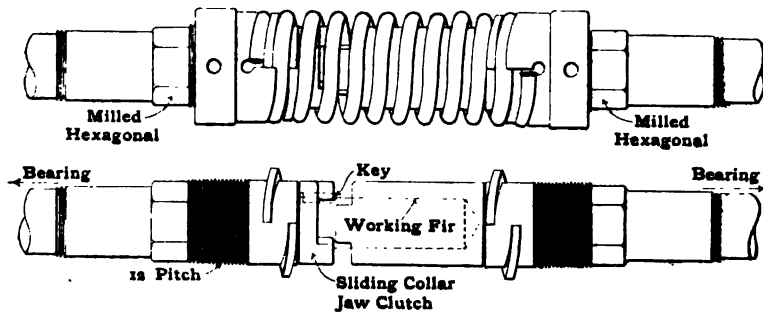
Details of Shaft and Spiral Spring Clutch Jaws.
